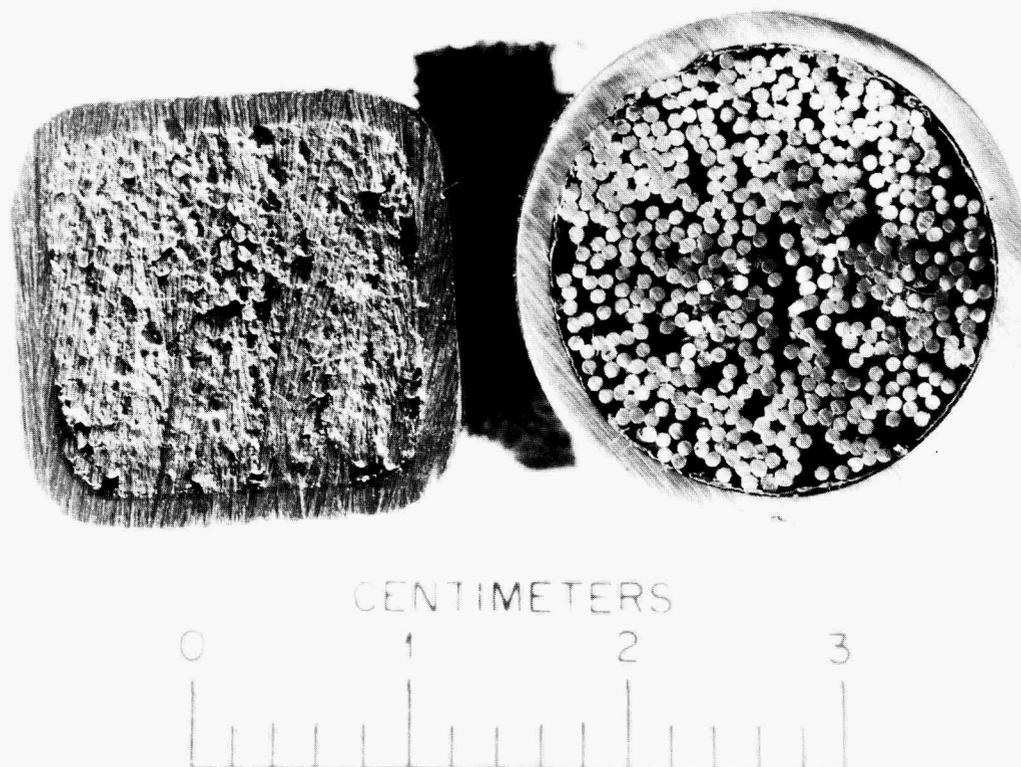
Cross sections of cable. Left, after forming. Right, as welded.
